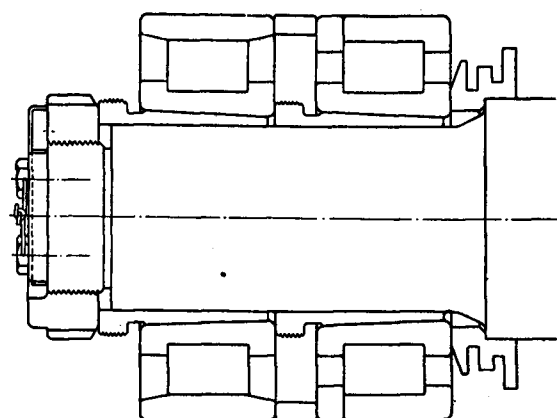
Axle bearing arrangement incorporating cylindrical roller bearings. Used from 1927. Bearing dimensions: $120 \times 240 \times 80$ mm.
